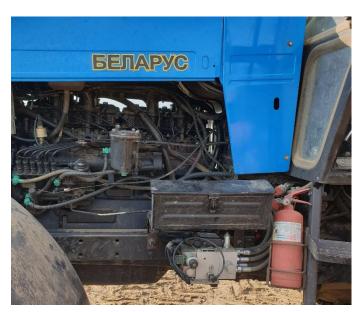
MANIFOLD BRACKET WITH A MANIFOLD AND HURAILIC DRIVE UNIT MOUNTED ON MTZ
